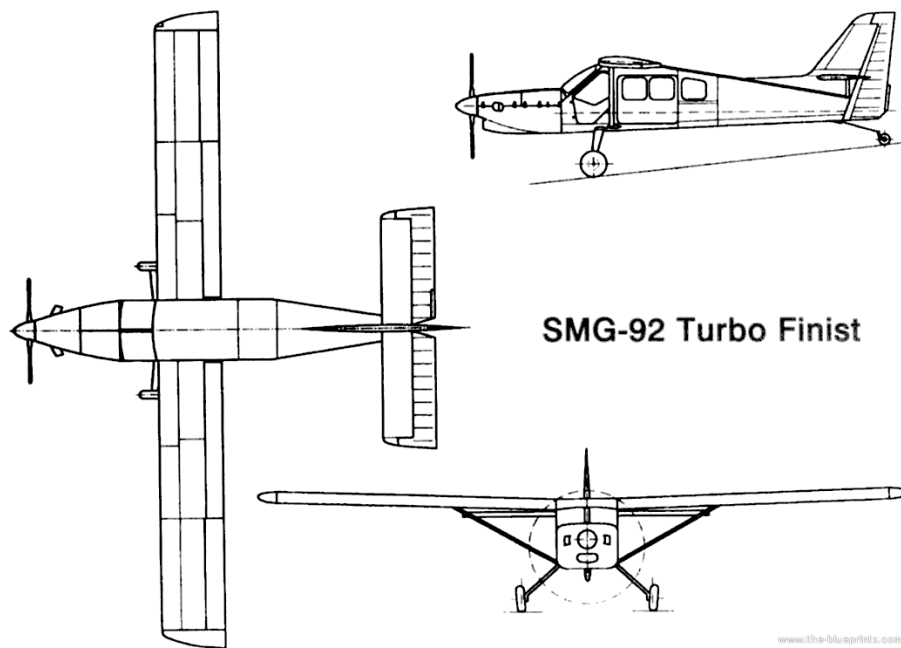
3 view drawing of SMG-92 Turbine Finist [34]
